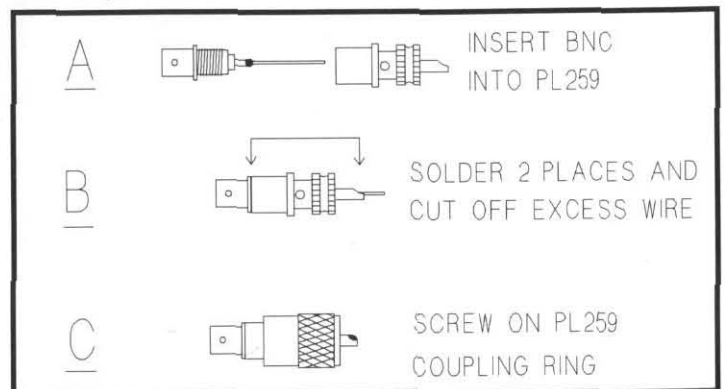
BNC single-hole-mount socket soldered into PL-259 plug makes a BNC/UHF adapter.
